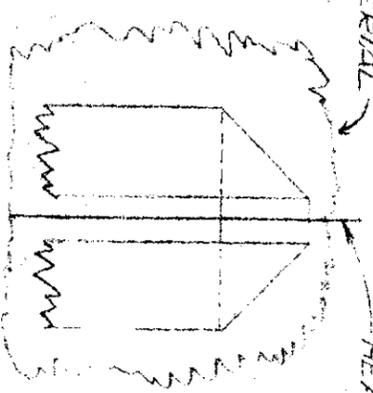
DETAIL OF TAPE ENDS TYPICAL 8 PLACES
